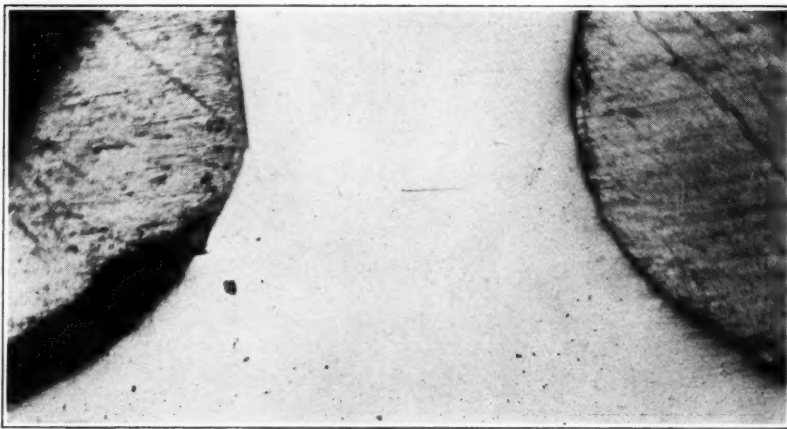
Dr. Eby. A 14K joint. Shows blowholes and fusing of wire.
